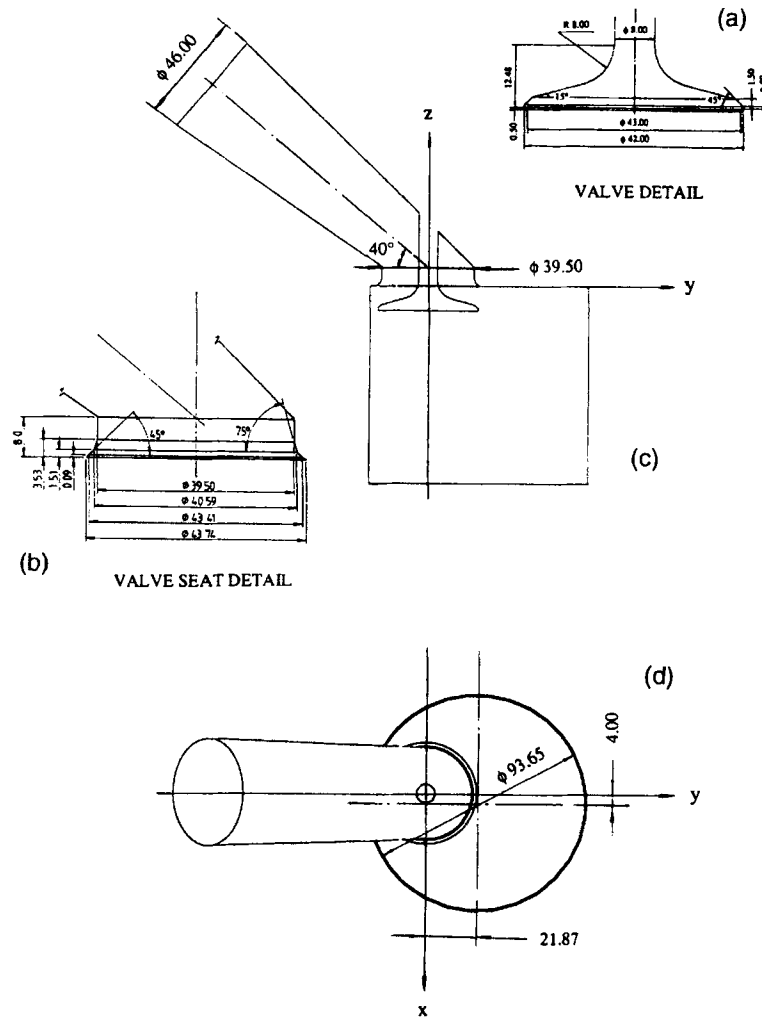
Inlet port, valve and cylinder configuration (all dimensions in millimetres): (a) valve detail; (b) valve seat detail; (c) elevation; (d) plan view
